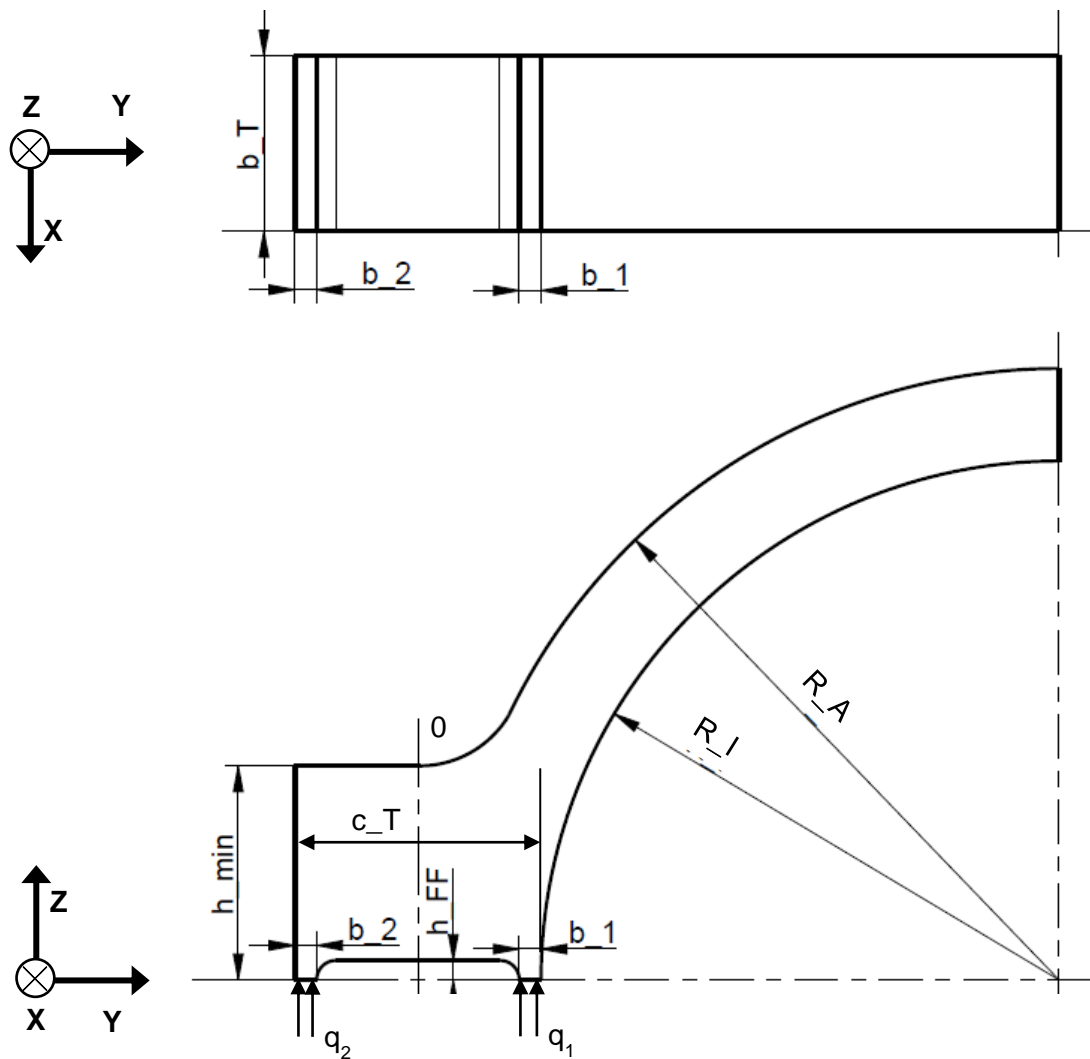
Cylindric casing with milled groove inside the joint surface. Source: [6]
